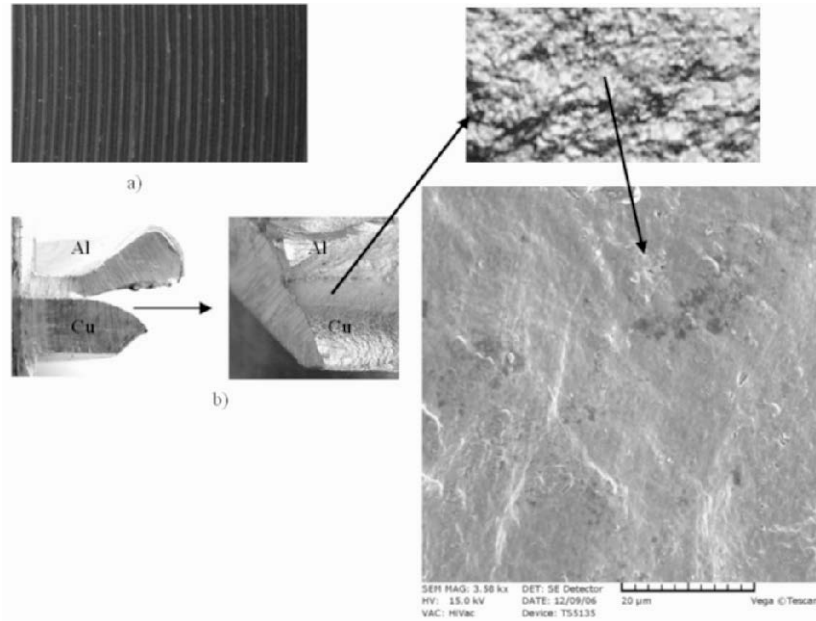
Surface structure (Figure 9b) prepared for cold pressure welding a) and surface structure from the region of the joint b)
